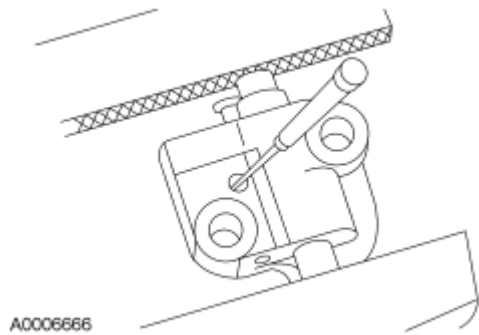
Holding Chain Tensioner Ratchet Lock Mechanism Away From Ratchet Stem
